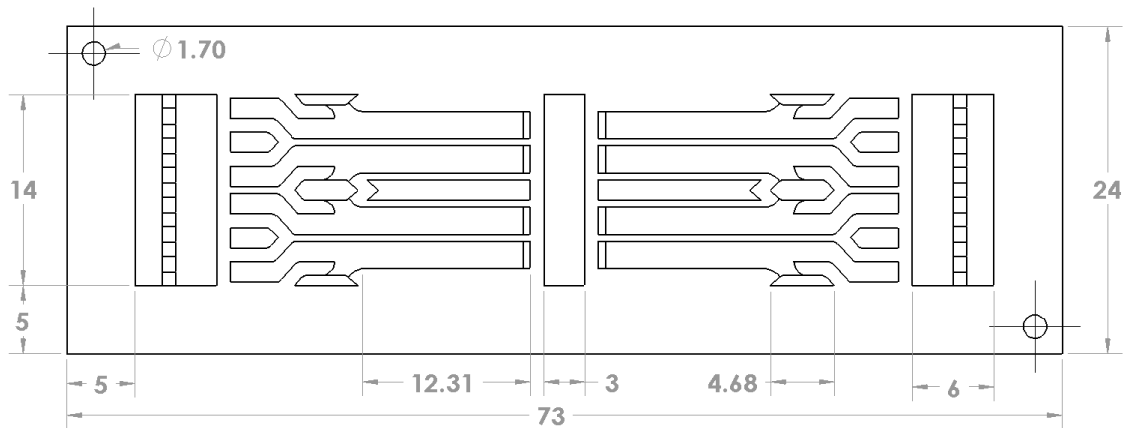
Dimensions of the combustion layer (numbers are in millimeters)
